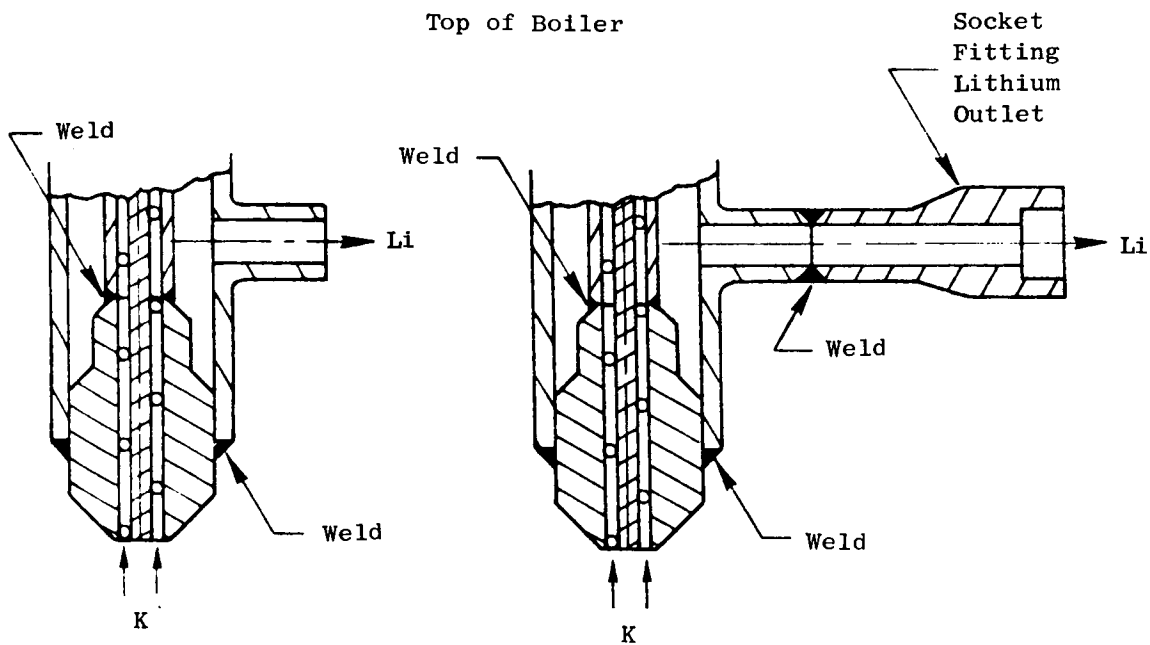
Socket weld fitting specimen to qualify this joint design for T-111 corrosion loop boiler repair and reinstallation.
